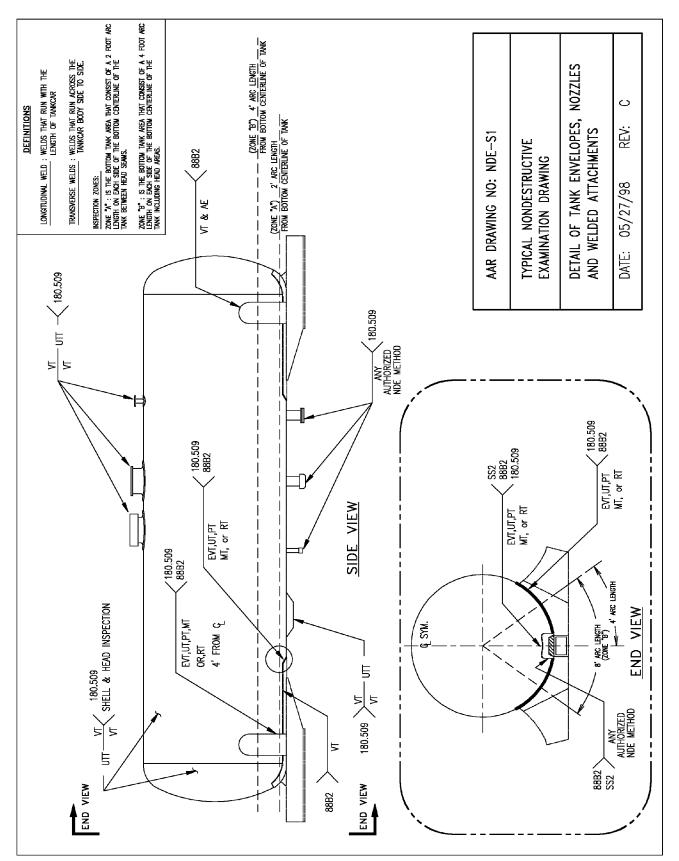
AAR Drawing No. NDE-S1 Detailing Tank Envelopes, Nozzles and Welded Attachments
